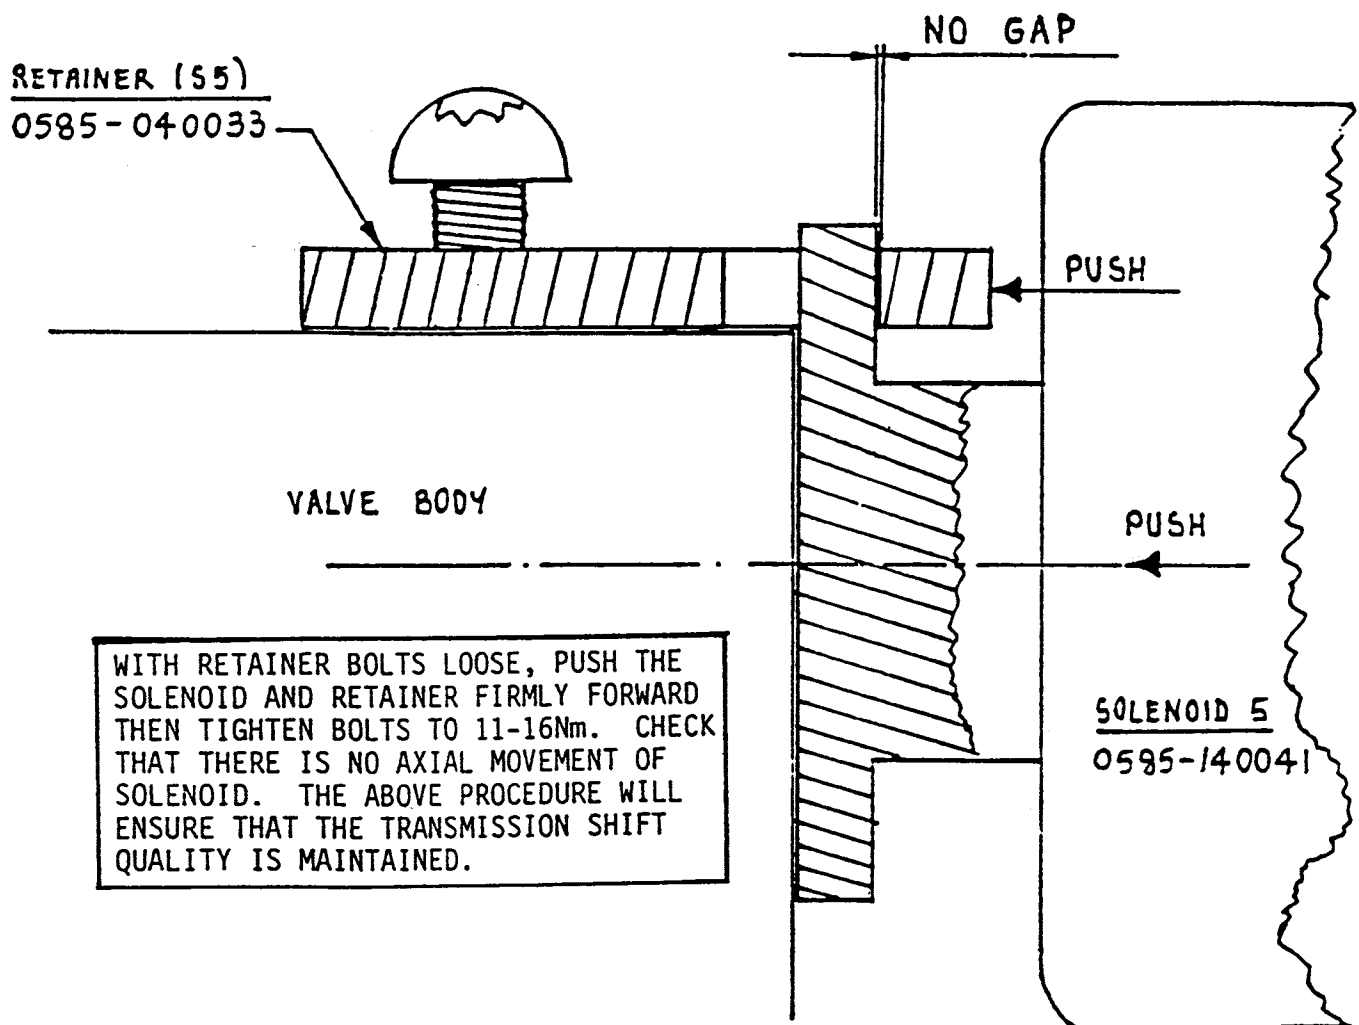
VPS AND RETAINER ASSEMBLY PROCEDURE
